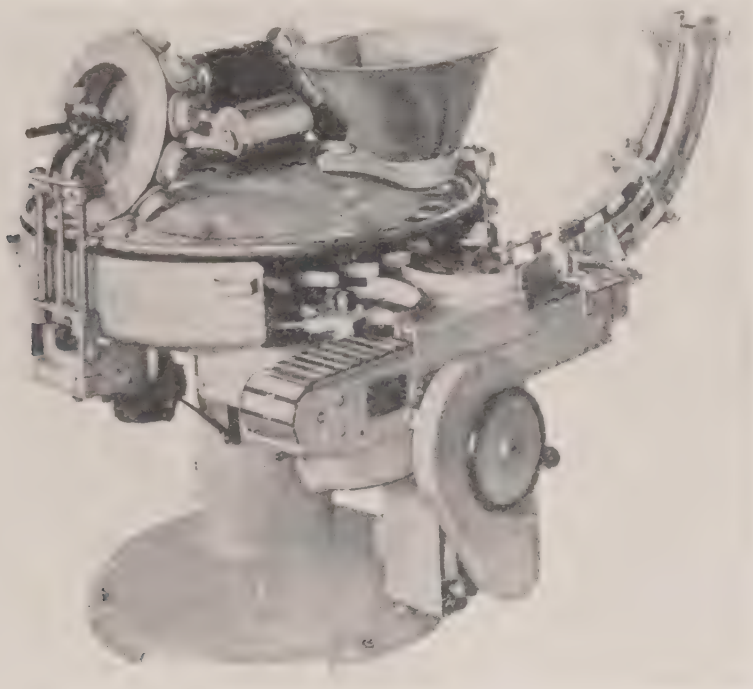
Hand pack filler equipped with standard gravity hopper, and brushing, juicer, tamping, and agitator attachments.
